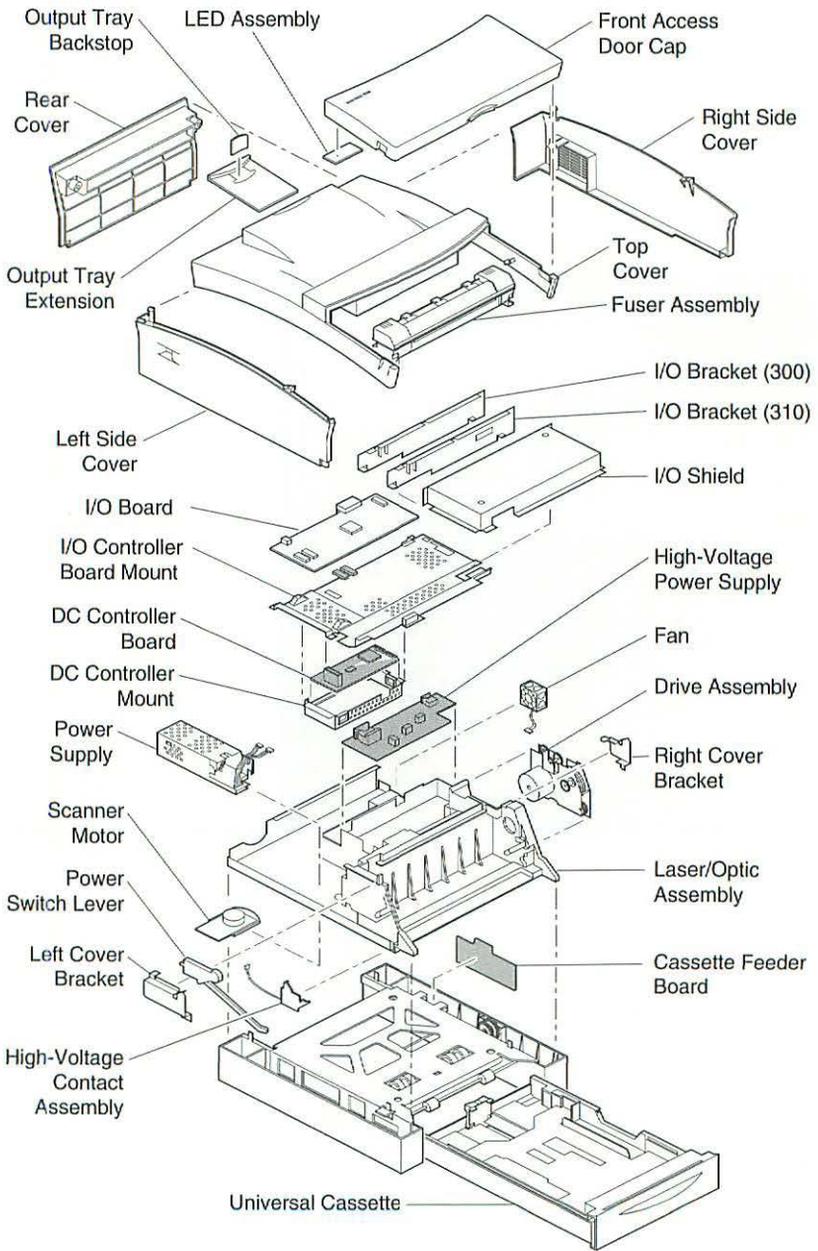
LaserWriter Select 360 Exploded View (1 of 2)
